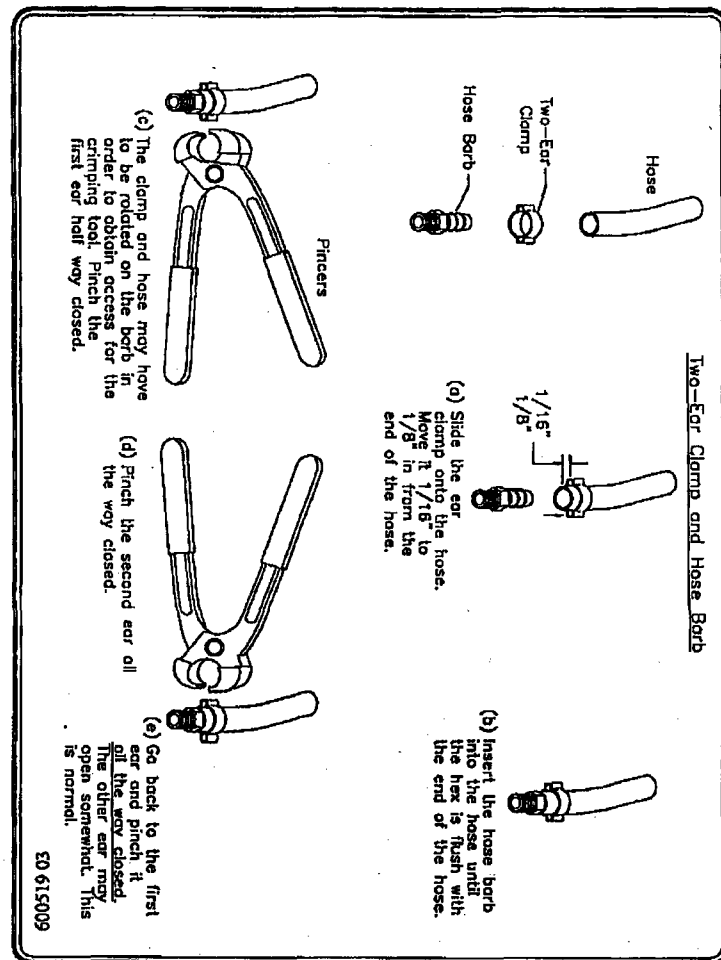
Two-Ear Clamp and Hose Barb Assembly Instructions
